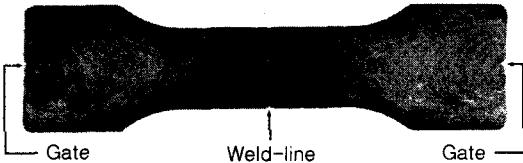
Soft X-ray photography of products after injection molding ($W = 25.4$ mm, $R = 30$ mm)
